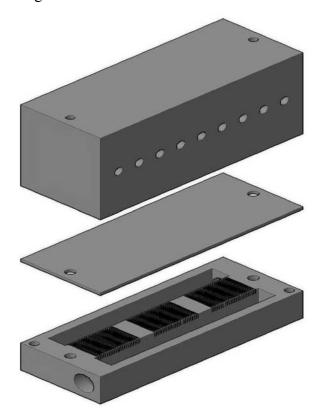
Exploded view of the microstructure device with the cover plate and the heating block
